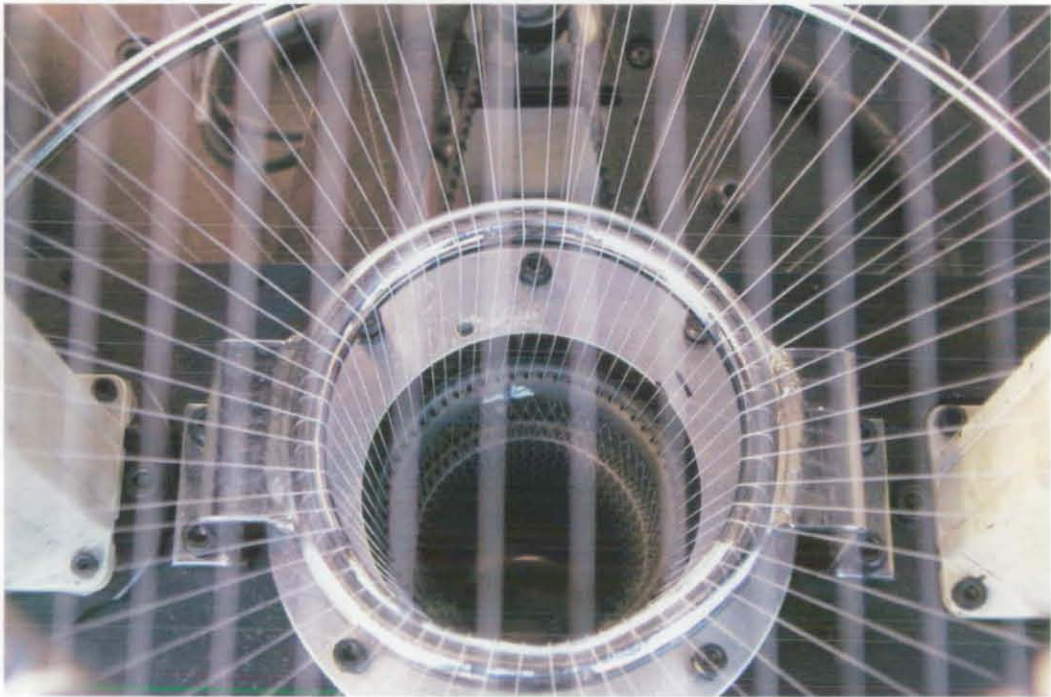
View of the Yarns Threaded in the Top Patterning Ring
